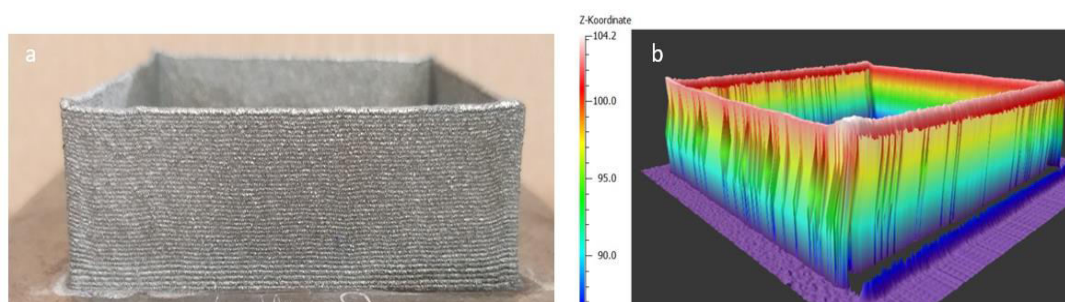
a) LMD manufactured component using height control; b) z-coordinates of a LMD component with optimized height control
